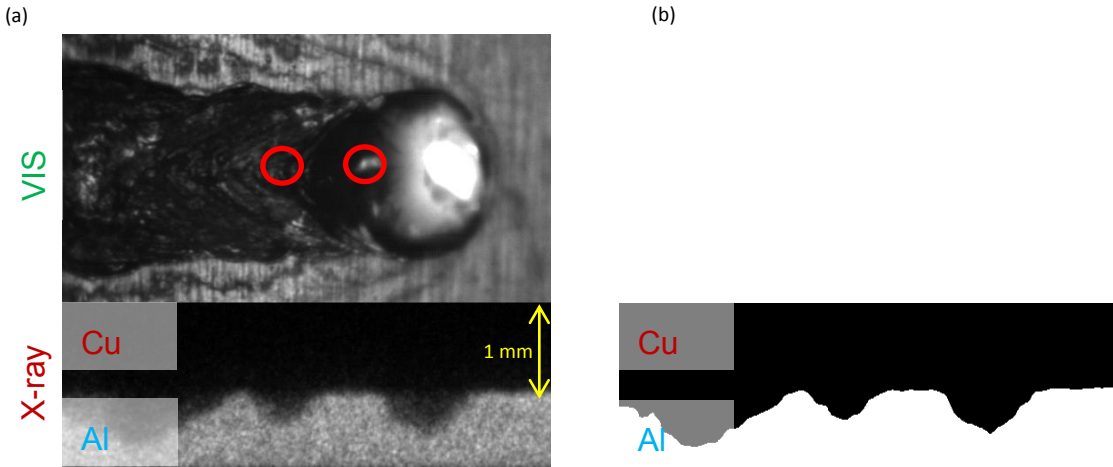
Welding of copper onto aluminum at 3.5 kW and 9 m/min federate. (a) Concurrent single frames from high speed videos of the weld seam in top view (upper picture) and the X-ray video (bottom). (b) Processed frame used for depth evaluation.
